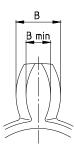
Measurement of gear rim wearing on the ROTEX claw coupling®
